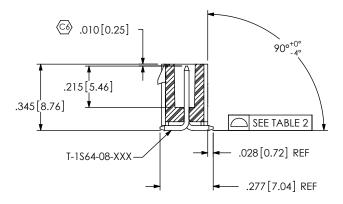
STYLE -02: SURFACE MOUNT IPL1-106-02-XXX-S SHOWN
